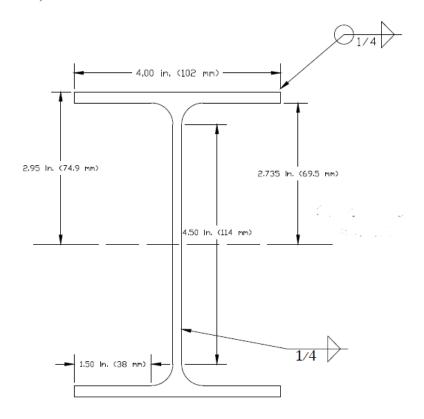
Top Post (W6X8.5) Weld Size
